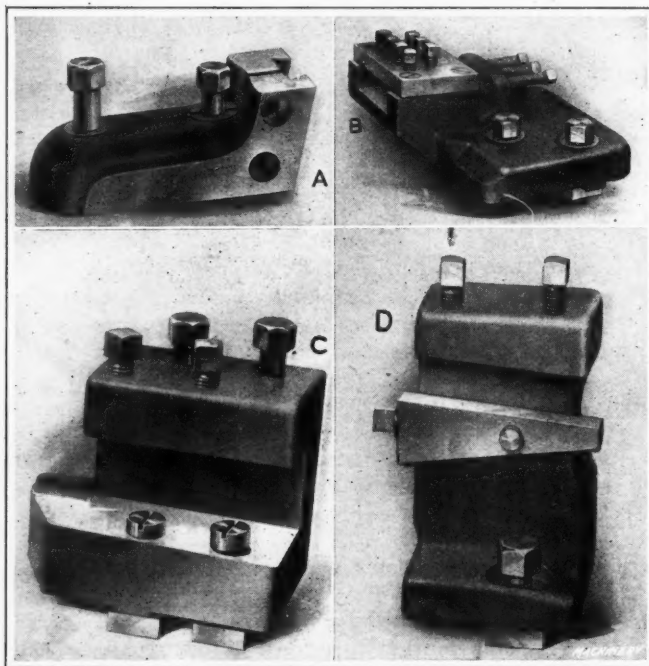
Forming and Cutting-off Tool-holders used on Gridley Single-spindle Automatic Turret Lathe
